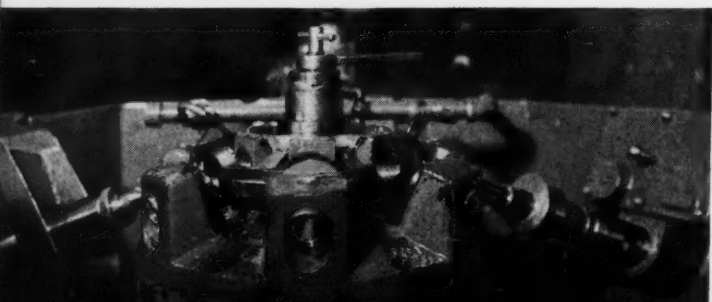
Six holes in the propeller shaft, equally spaced radially, are drilled, reamed, and step reamed in this Natco special three-spindle machine.
